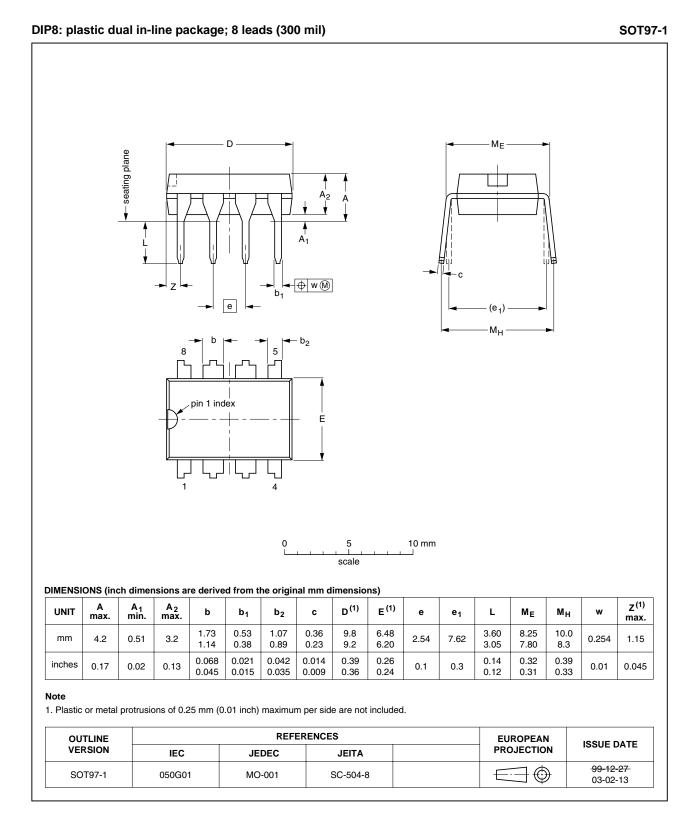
Package outline SOT97-1 (DIP8) of PCF8583P
